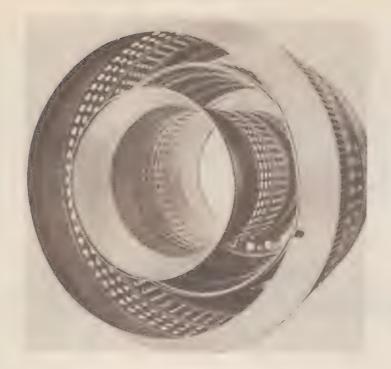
An end view of the combustion chamber of the J34 turbojet.
